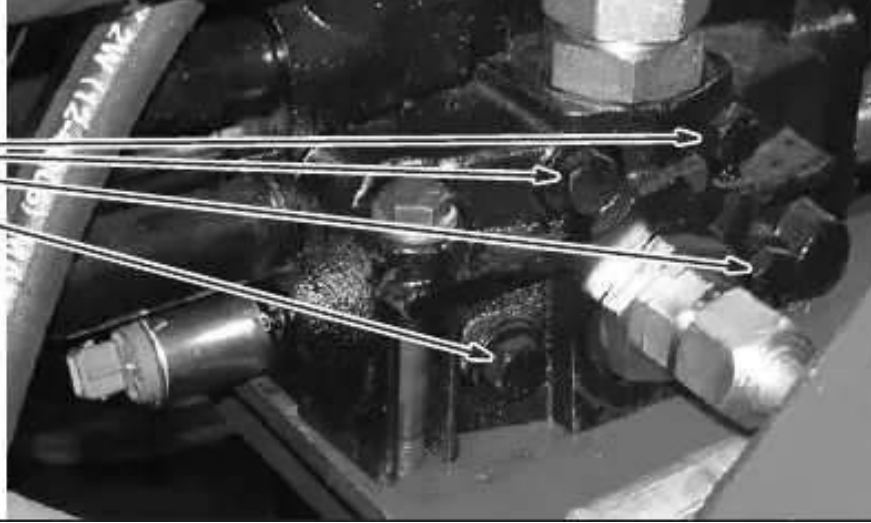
Valve Bank Through Bolts (Lift / Tilt Side)
